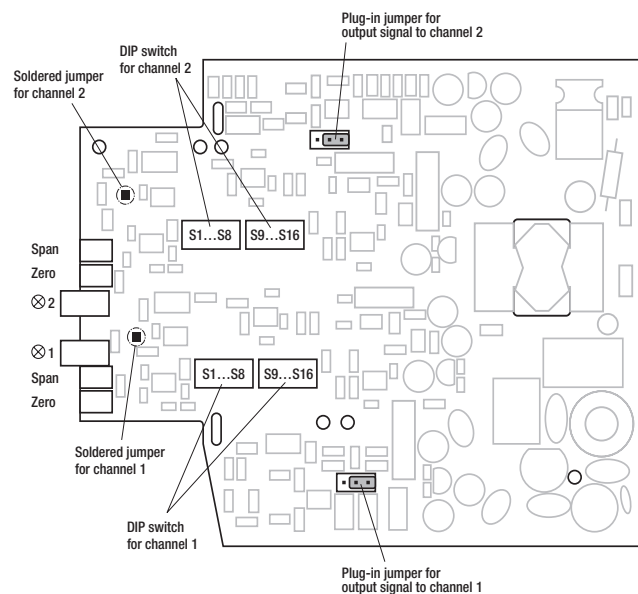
Position of the DIP switches S1...S16, plug-in jumpers and soldered jumpers.
